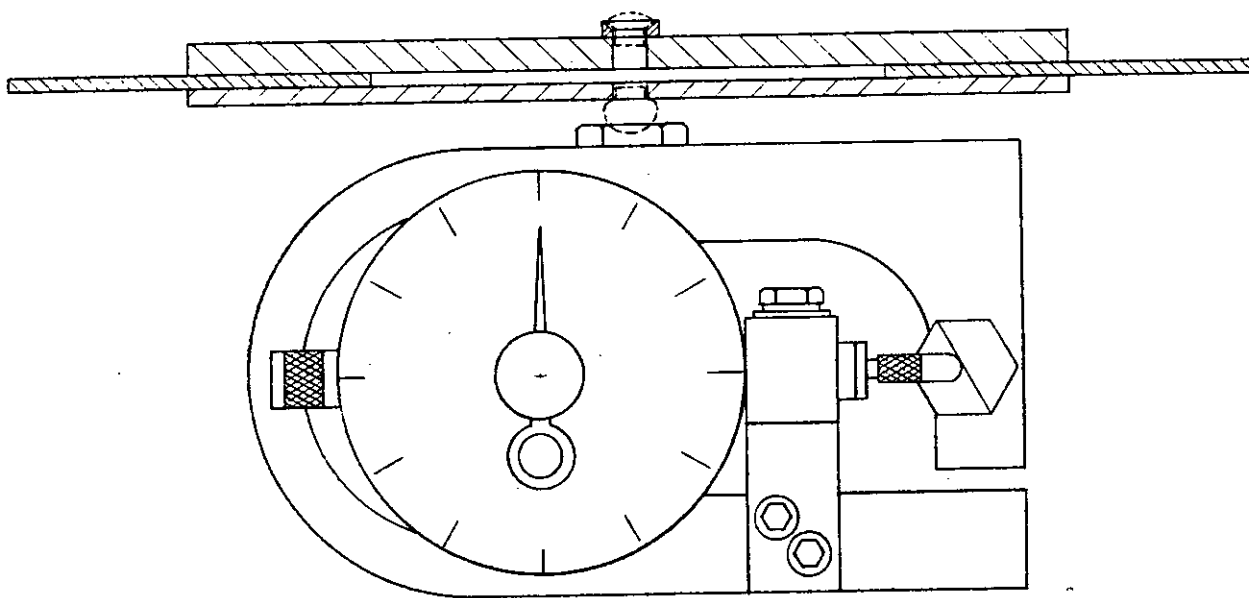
Test specimen in typical test fixture prior to application of load.
